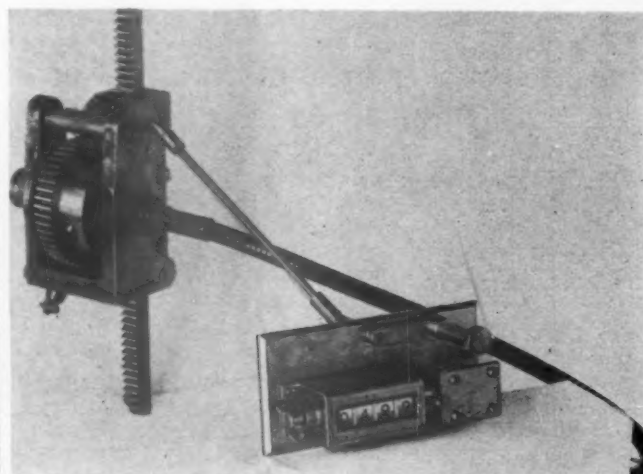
THE RACK AND BALL-CLUTCH MECHANISM AND THE RECORDING MECHANISM, COMPLETE BUT UNMOUNTED
